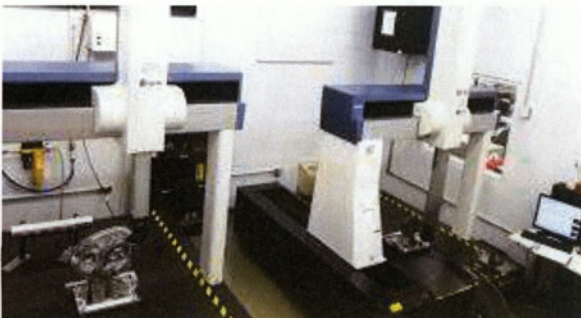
Coordinate Measuring Machines used for dimensional inspection
